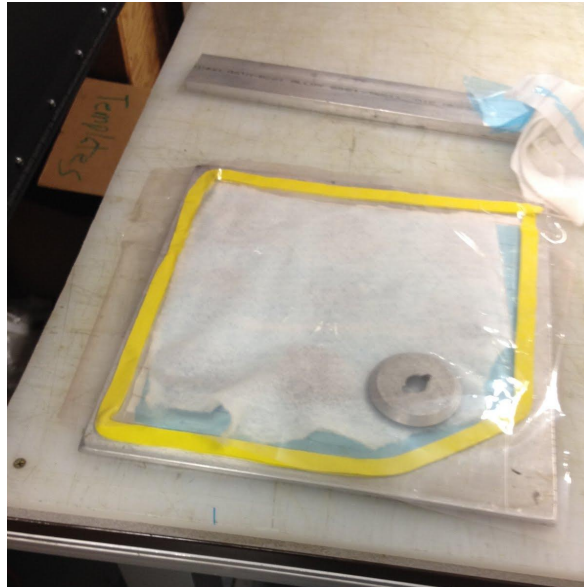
Placement of the vacuum bottom and pink final sheet in place
